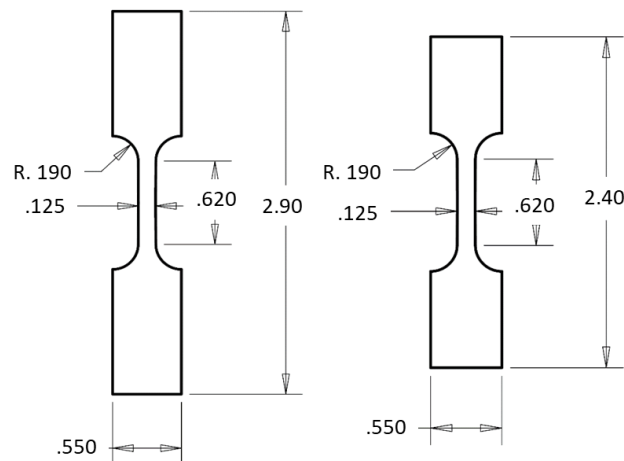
Specimen geometry for mechanical testing in a) machined and b) as-built
